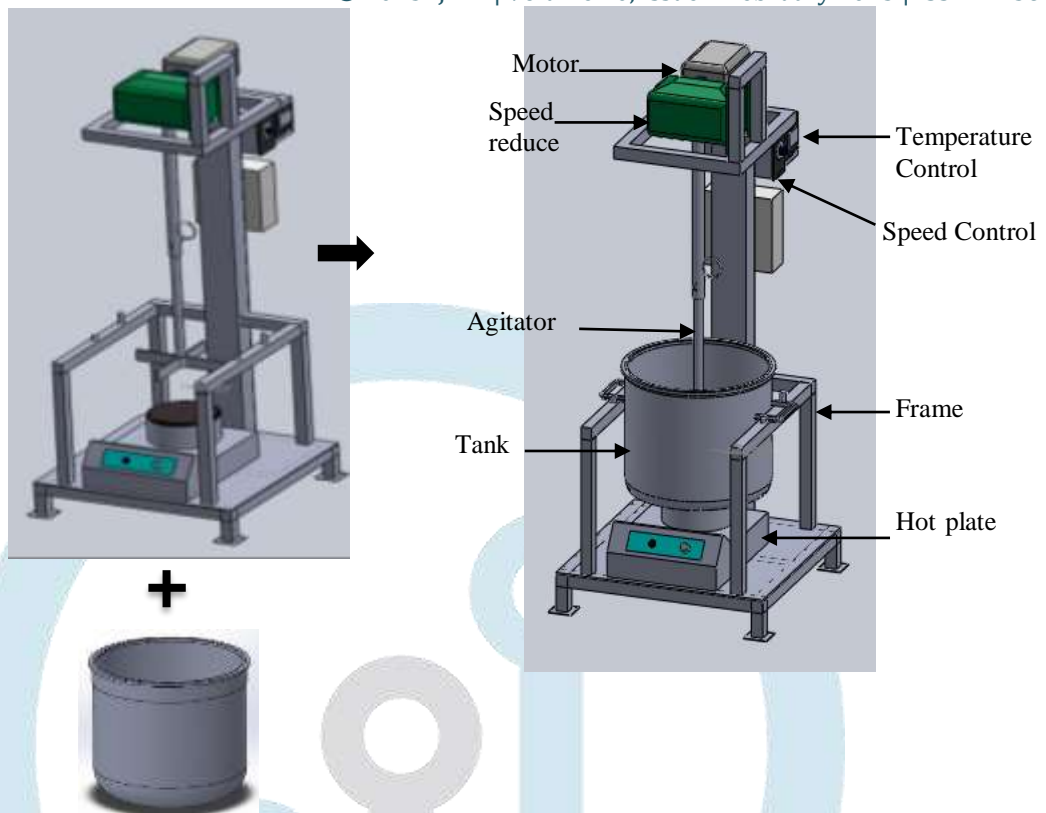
Assembly drawing of the Automatic Heating and Mixing System drawn in Solid Works
